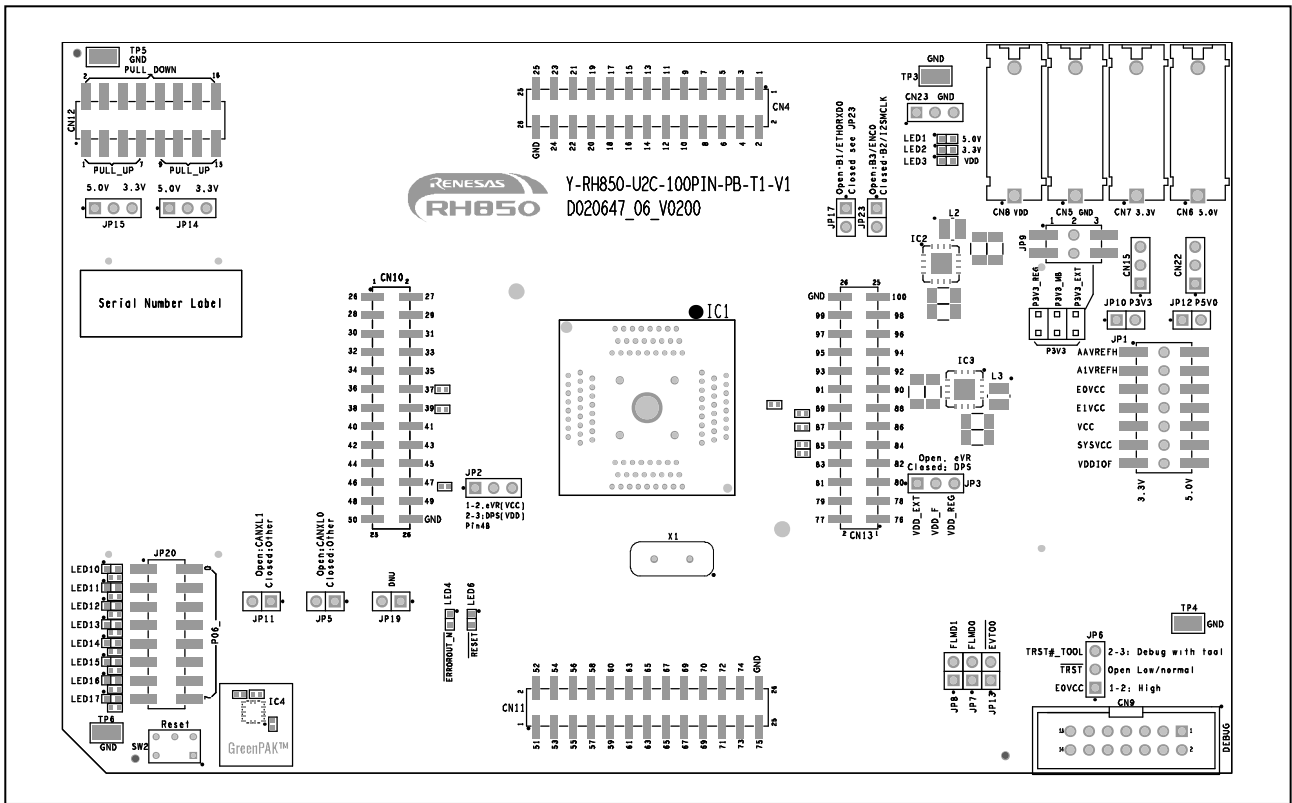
Piggyback board top view of board version D020647_06_V02
